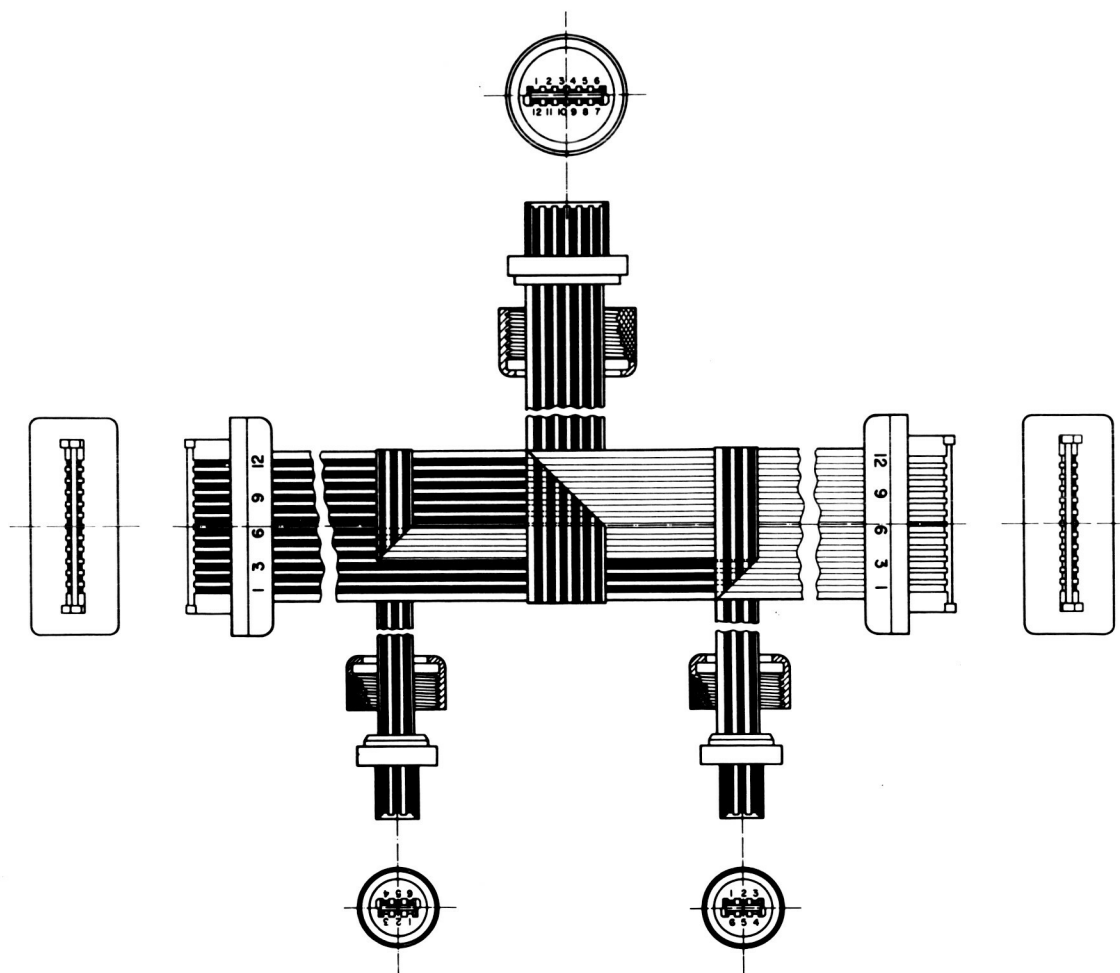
TYPICAL DESIGN OF ASSEMBLED CABLE
